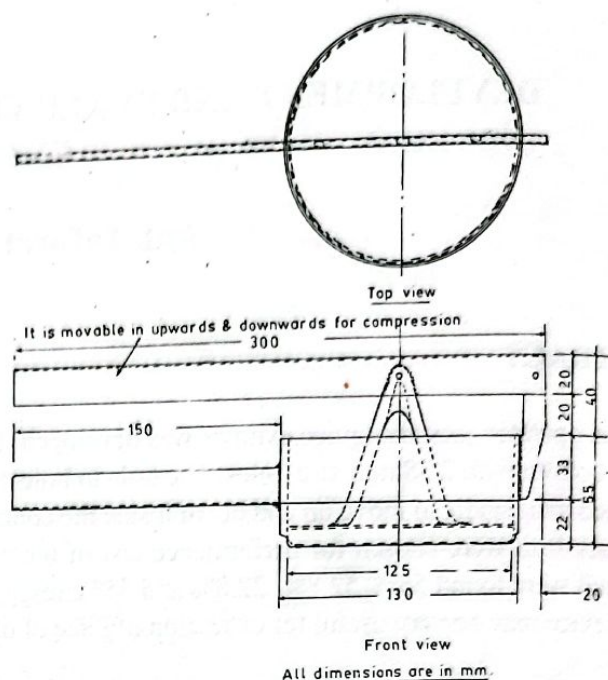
TOP VIEW AND FRONT VIEW OF HAND OPERATED JACK-FRUIT JUICE EXTRACTOR.
